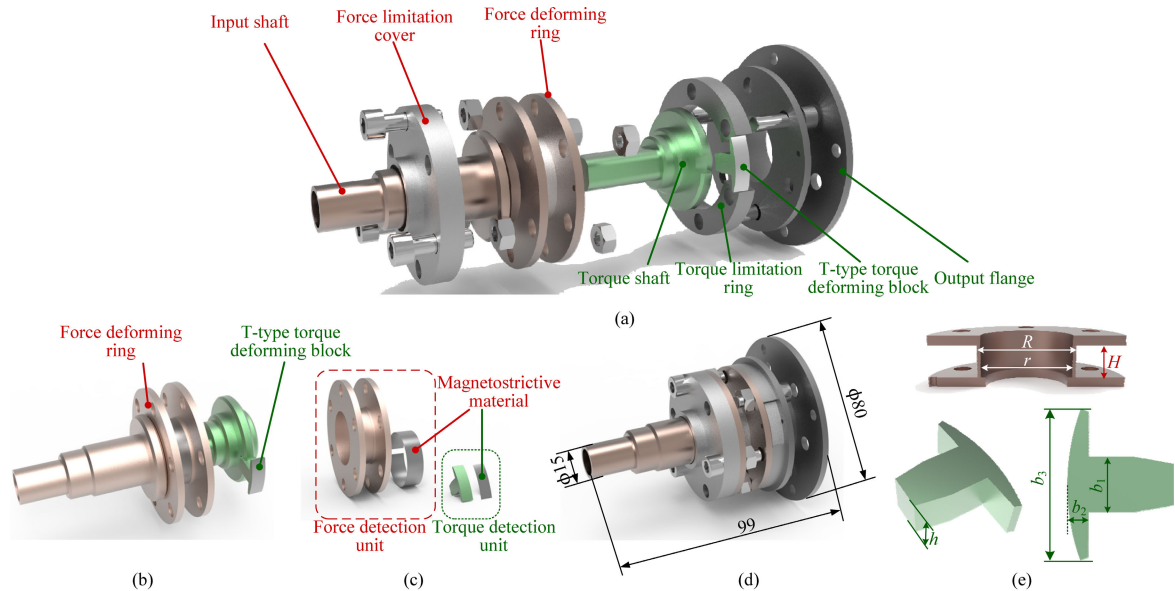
View and structure of the TTS. (a) explosion view of the TTS; (b) key force detecting component; (c) detecting units; (d) axonometric projection; (e) parameters of the force deforming parts, $R = 15\text{mm}$, $r = 14\text{mm}$, $H = 10\text{mm}$, $b_1 = 7.05\text{mm}$, $b_2 = 2.59\text{mm}$, $b_3 = 19.15\text{mm}$, $h = 6\text{mm}$.
